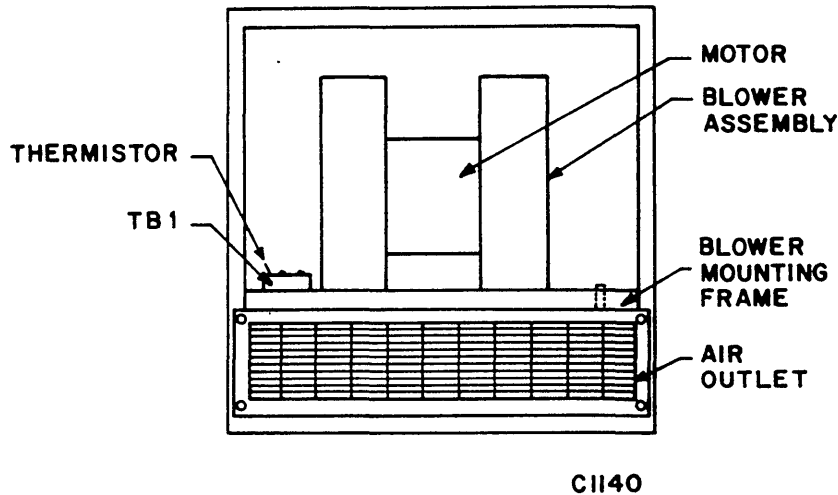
Outlet Air Temperature Thermistor and Blower Assembly
